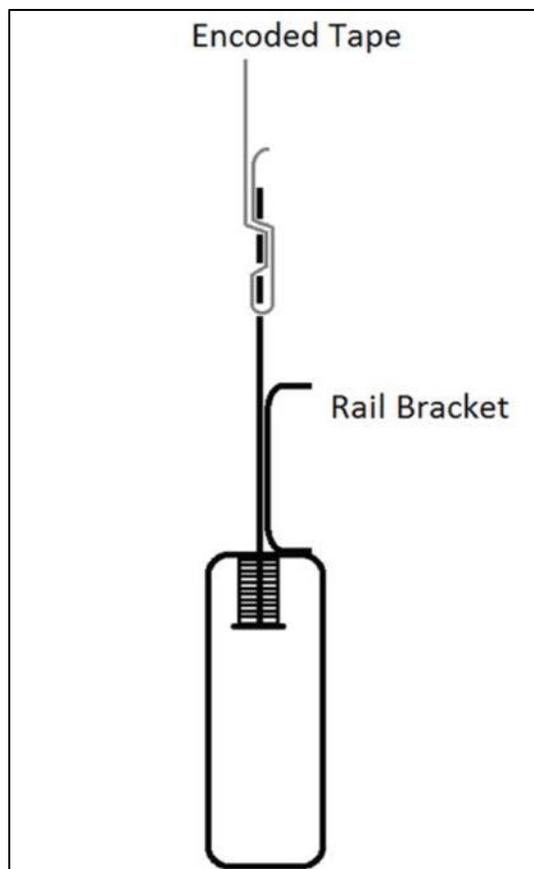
Side View of Encoded Tape Attachment to the Bottom Bracket
